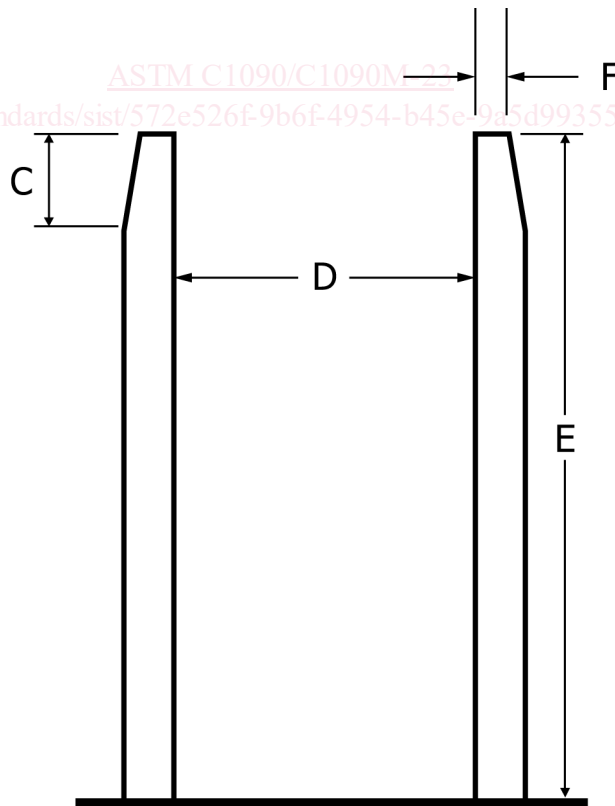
Cylinder Mold with Machined (Tapered) Top Edge (see Table 1 for dimensions)
